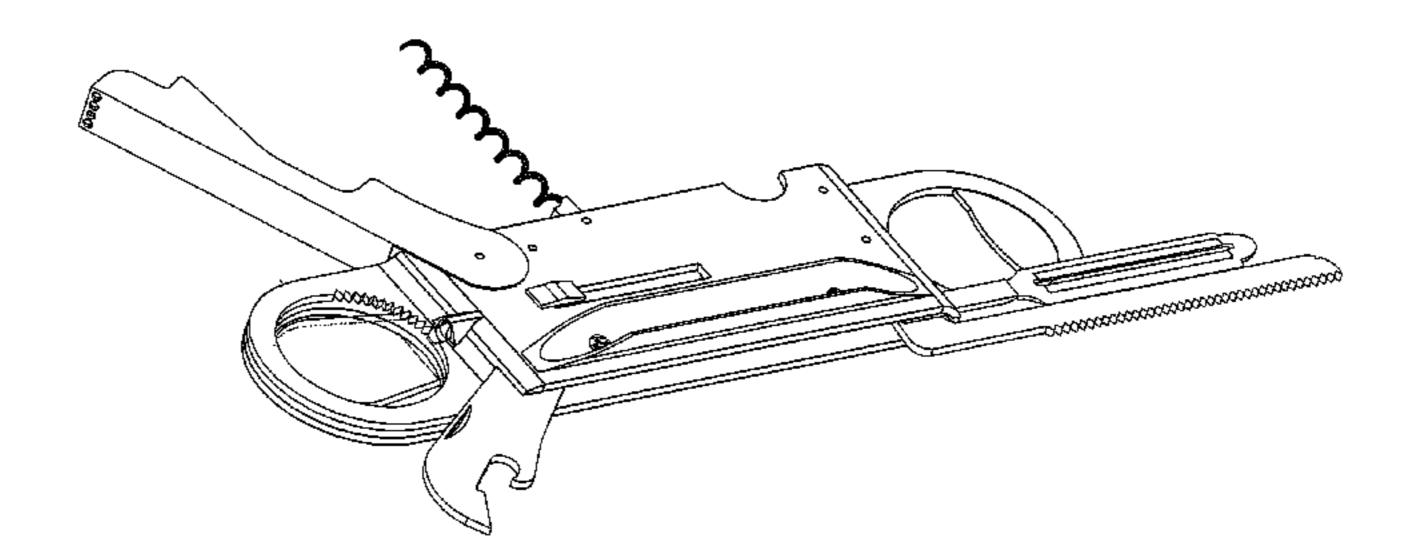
is a second side view of a multipurpose tool showing the tools in a deployed position, in accordance with the present invention;
